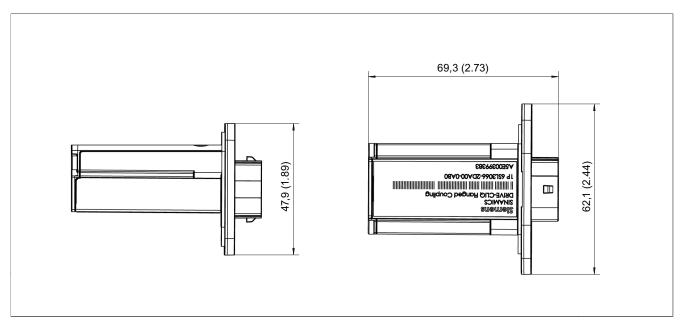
Dimension drawing of the DRIVE-CLiQ cabinet bushing, all dimensions in mm and (inches)
